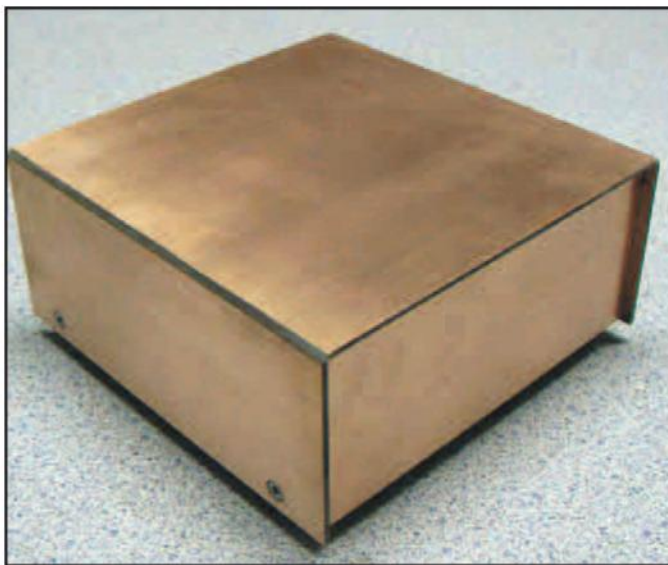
Photo K. The completed enclosure, ready to be drilled for component mounting, painted (if you’d like) and labeled. The finished product is back in Photo A.
